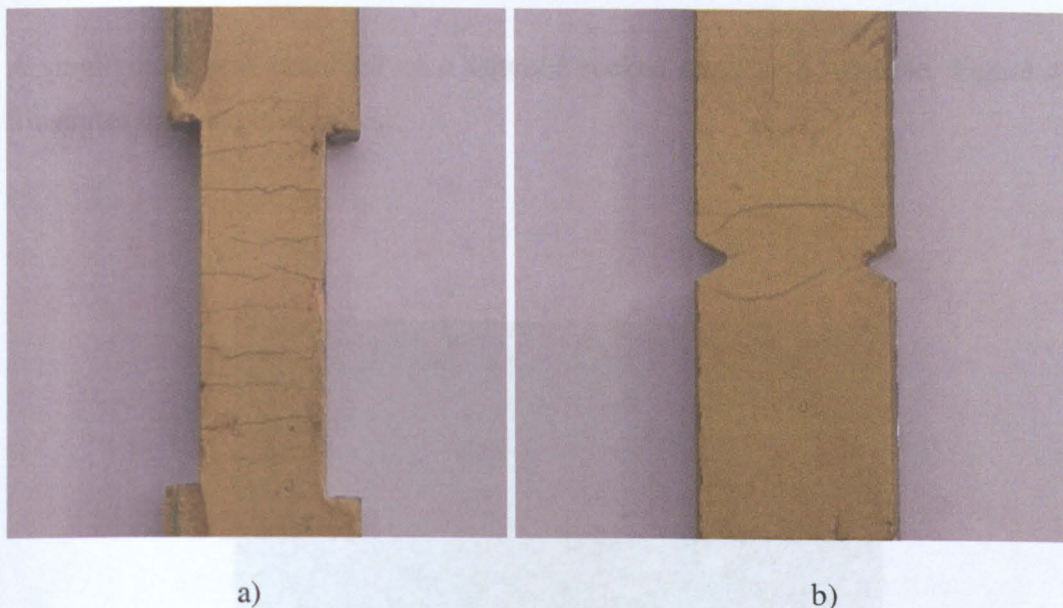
a) Cracked, parallel specimen of coating 'B' showing multiple cracks; b) Cracked, dry notched specimen of coating 'B' showing a double crack
